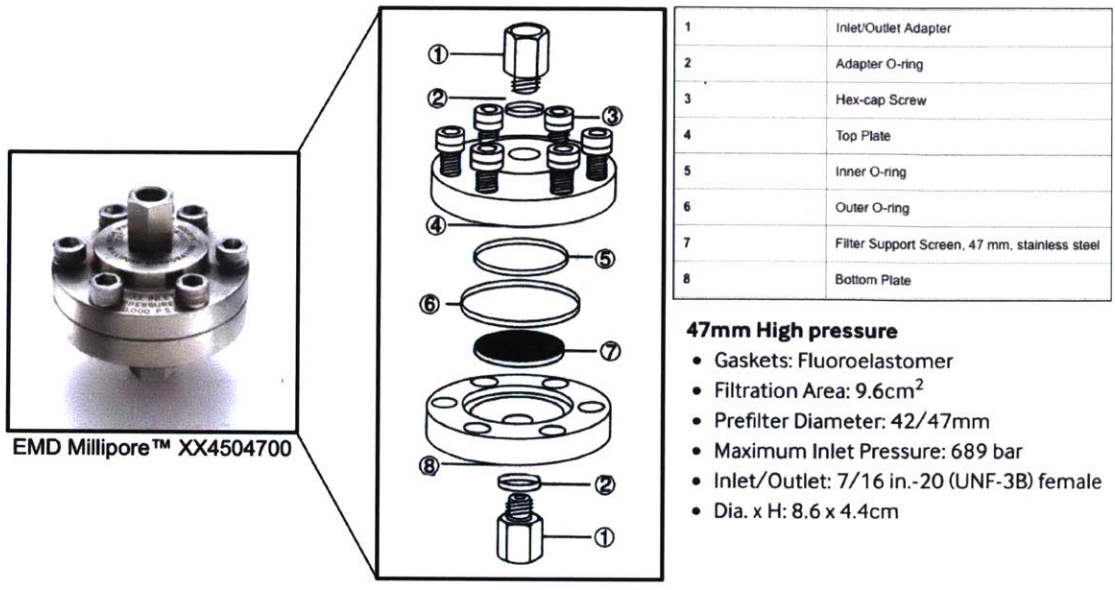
HDRO prototype membrane assembly [Millipore Sigma].
